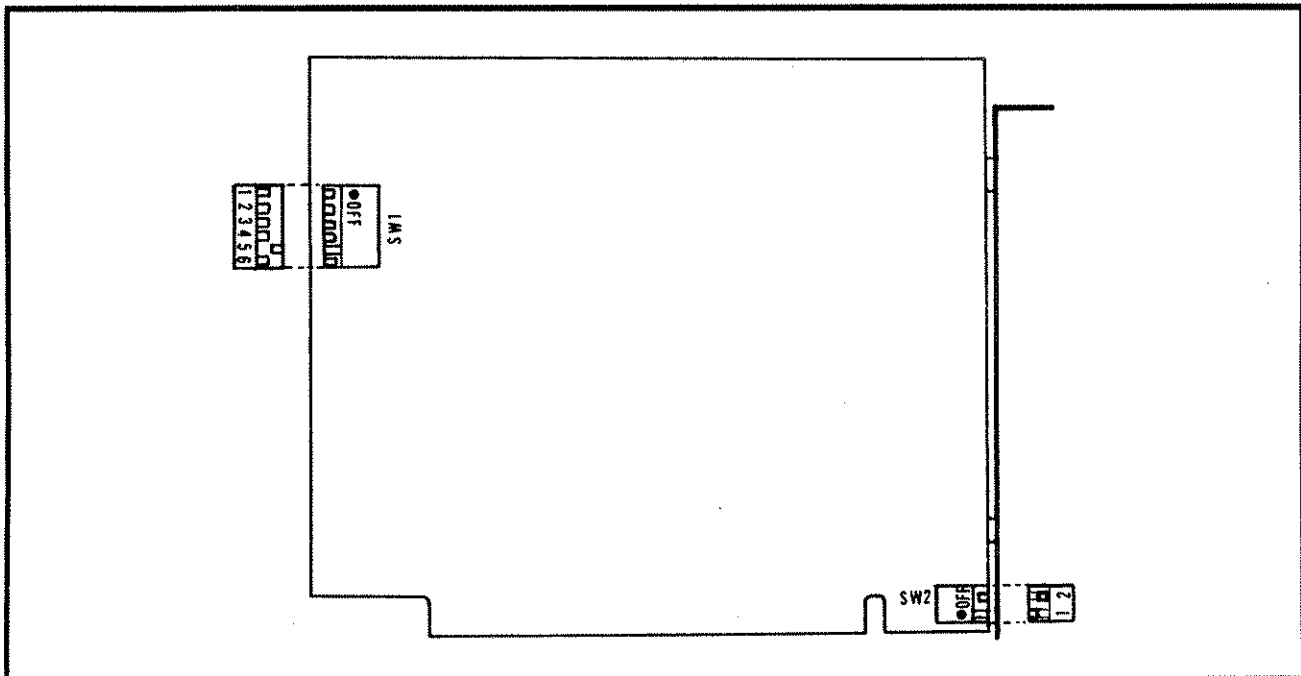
ROM Disk Board Assy 4A3, DIP Switch Settings.
